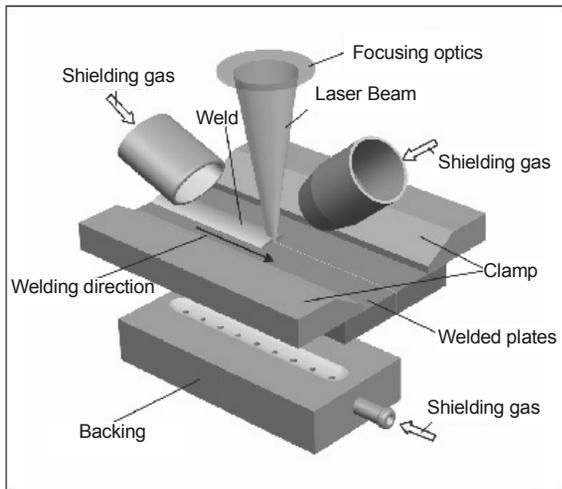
A view of the device for mounting of welded joints with a copper backing plate
